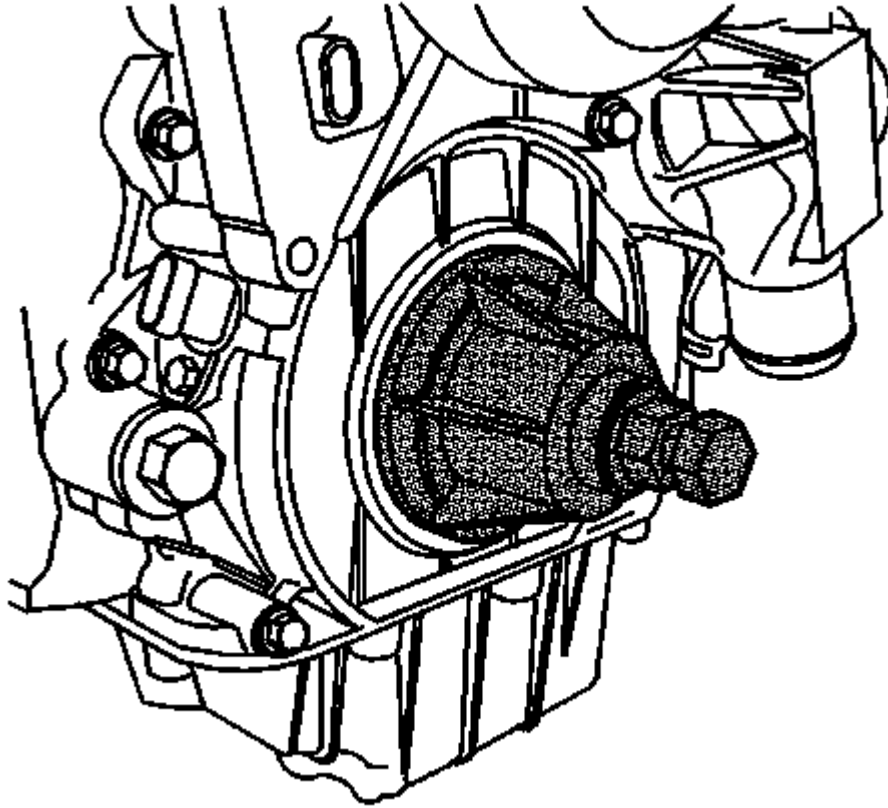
Pressing Crankshaft Front Oil Seal On Using J 44645
